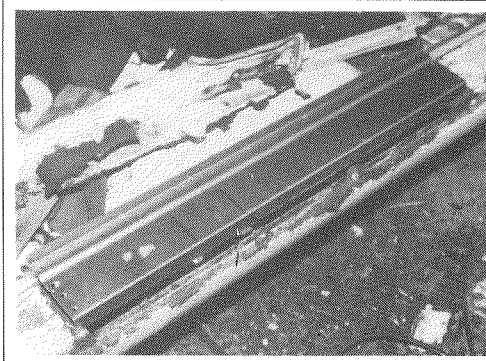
Given a little modification, another tread plate is an ideal basis for the replacement floor edge. Start by carefully marking out the mounting bracket position on the repair panel.
